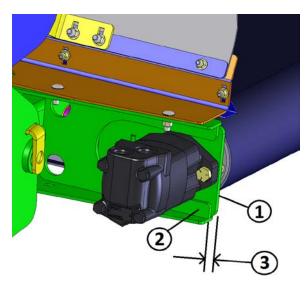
Motor End Adjustment Key 1 – Motor Frame Key 2 – Pivot Frame Key 3 – Dimension: ¼" (6mm) here
